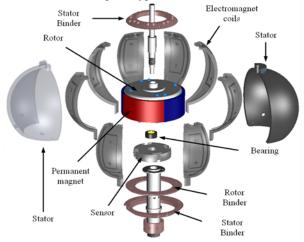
Exploded view of multi-degree of freedom spherical motor
